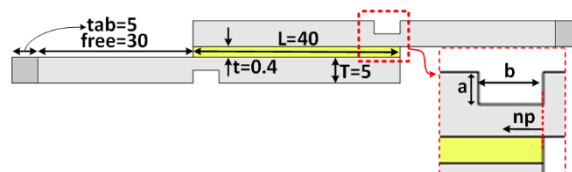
Schematic geometry of the modified single lap joint with adherend notching (dimensions in mm)
